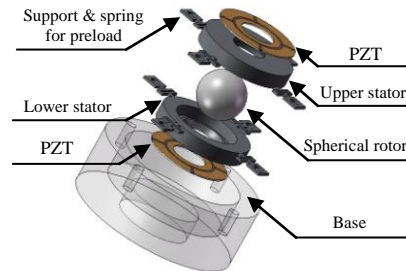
Assembly and component parts of SUSM in sandwich structure.
